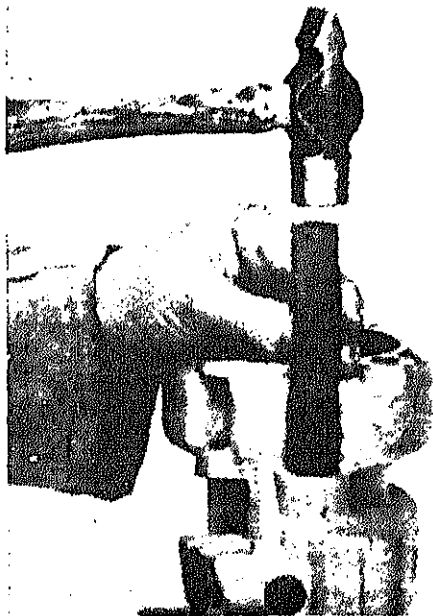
Removing bushing 9210 0615 and sealing rings for torsion shaft by means of tool 9201 0396.
